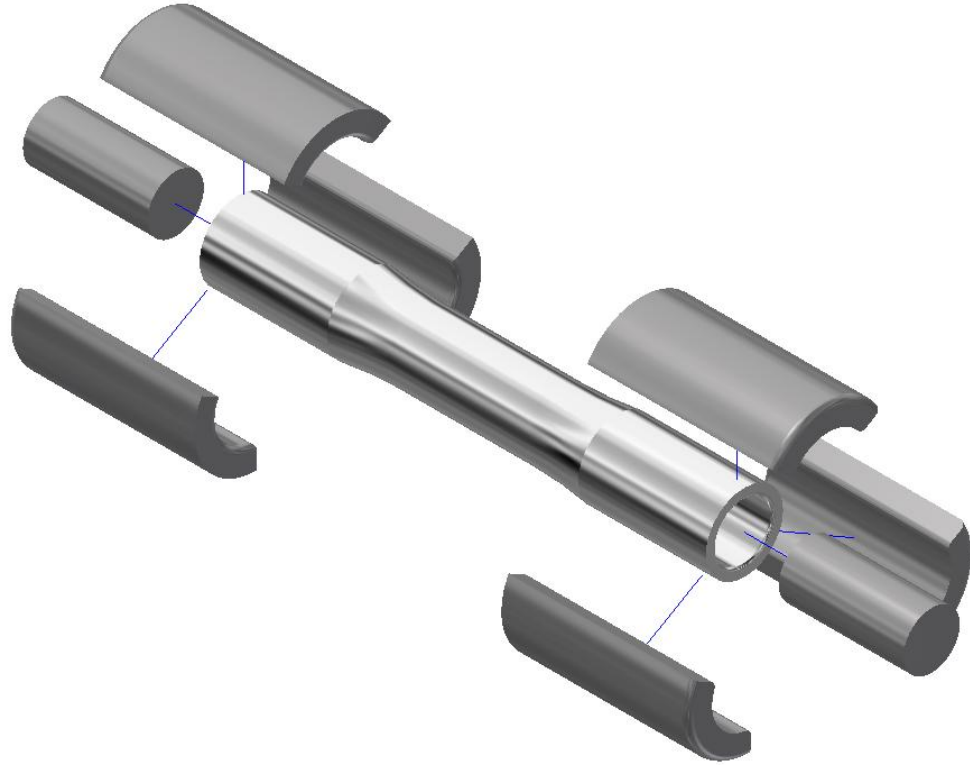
Exploded View of Modified Specimen, Plugs, and Adapters
